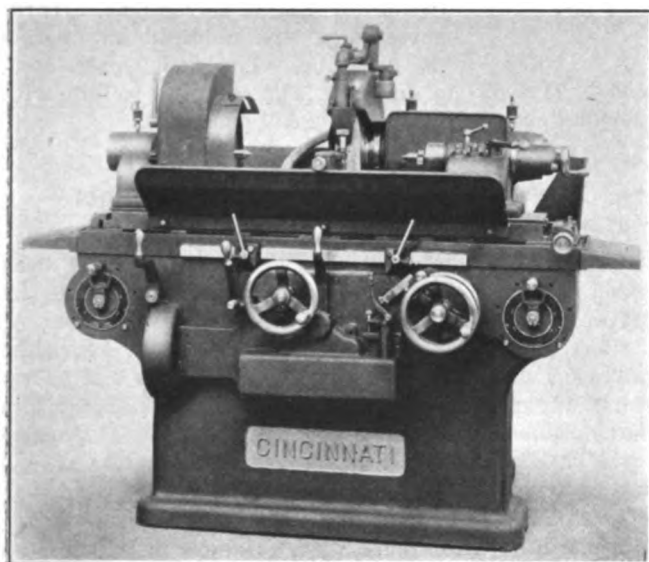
CINCINNATI 12-INCH PLAIN CYLINDRICAL GRINDING MACHINE
